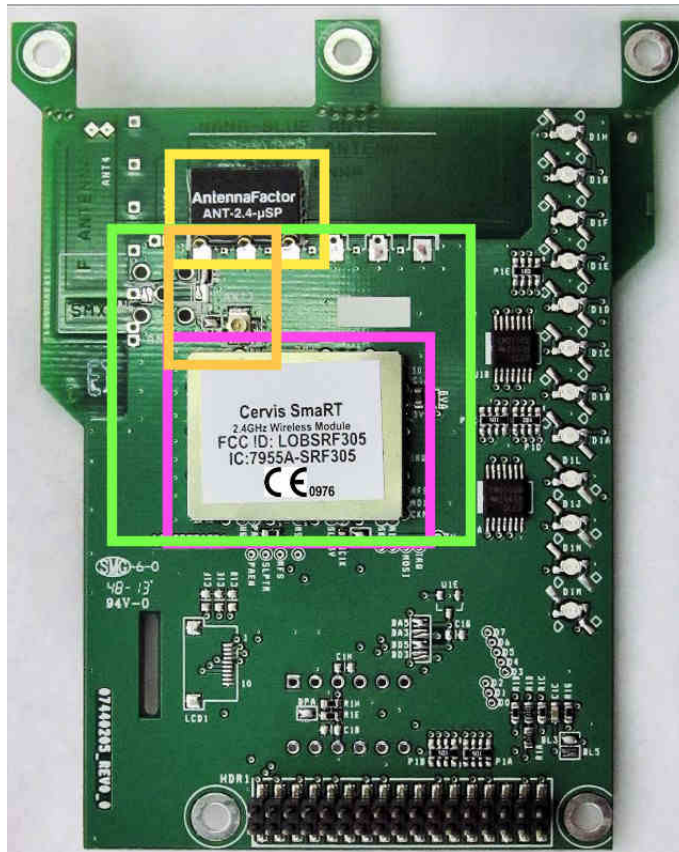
SRF305 Type 1 module, antenna mounting and RF transmission line are part of the module PCB.
